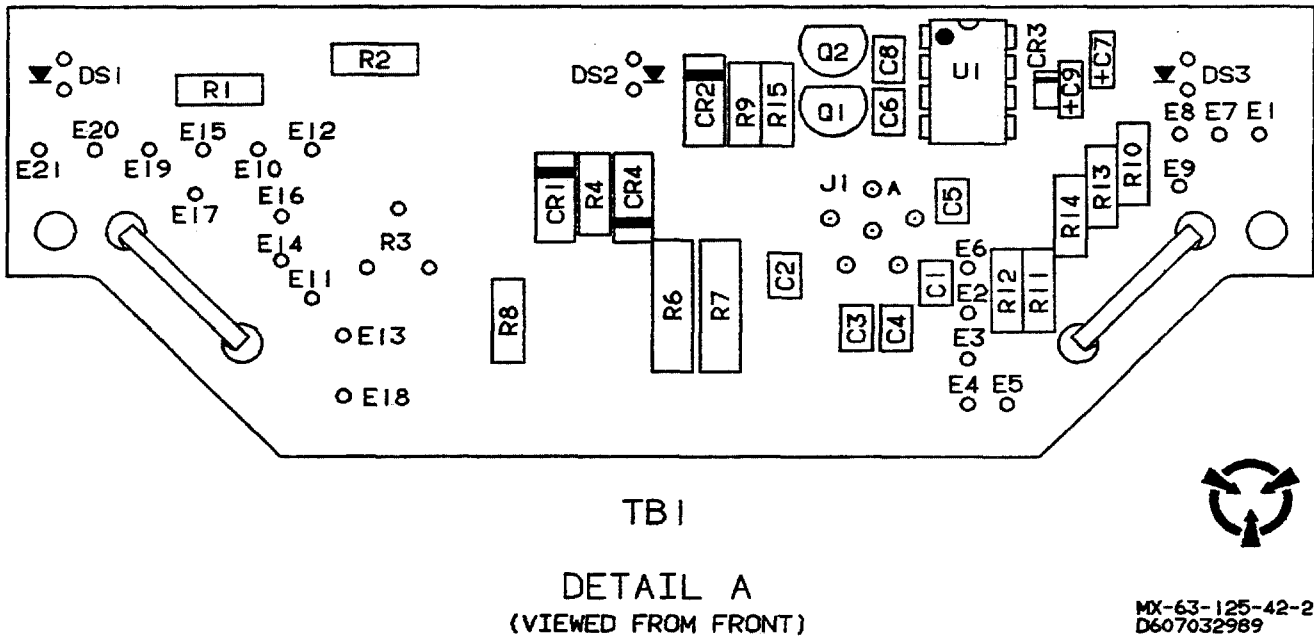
PS/A Chassis Component Location (Sheet 2 of 2)
